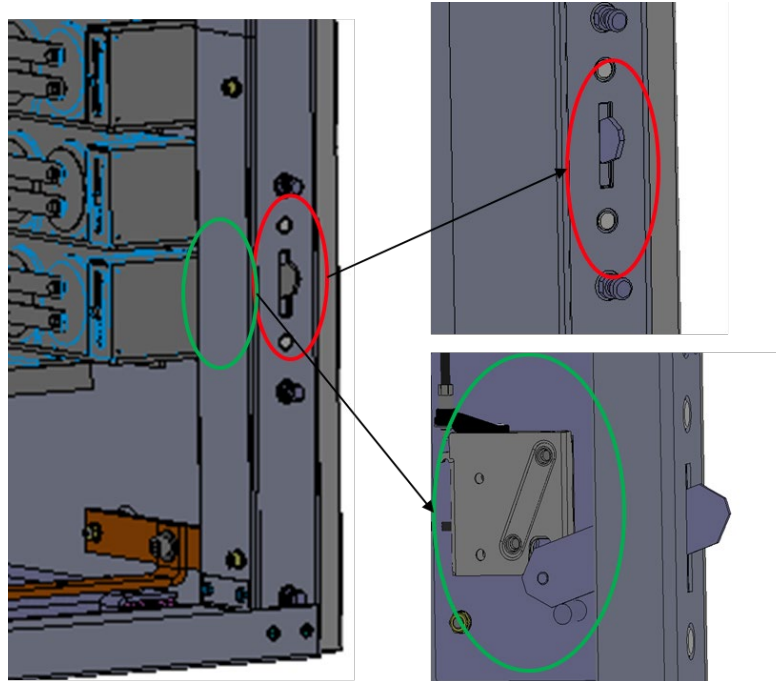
FLCB panel detailing electromechanical locking mechanism used to implement the interlock and prevent opening when conditions are unsafe
